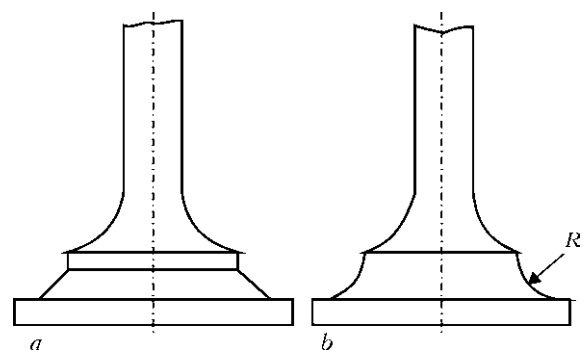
Schemes of trapezoid (*a*) and radius (*b*) groove of valve billets for surfacing
